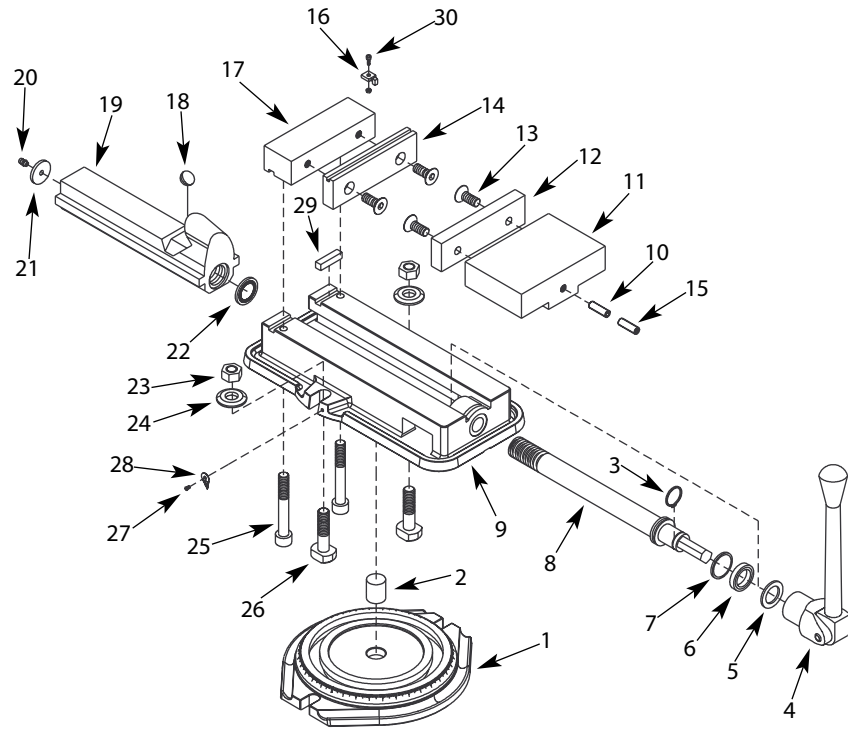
Replacement Parts Illustration for 6" Precision Milling Vise
